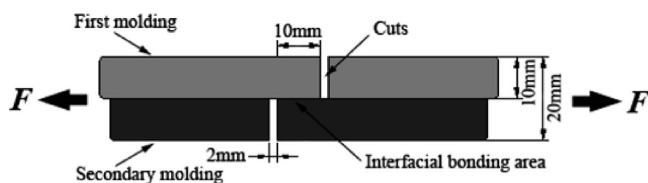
Dimensions of specimen for the lap shear measurement.
